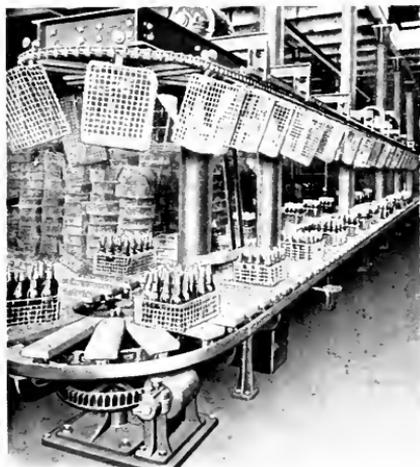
Motor Driven Horizontal Stationary Conveyors. Lower conveyor of the slat type and upper of chain and hook type. Shows containers for adapting the product to conveyor handling. Empties returned on upper conveyor
